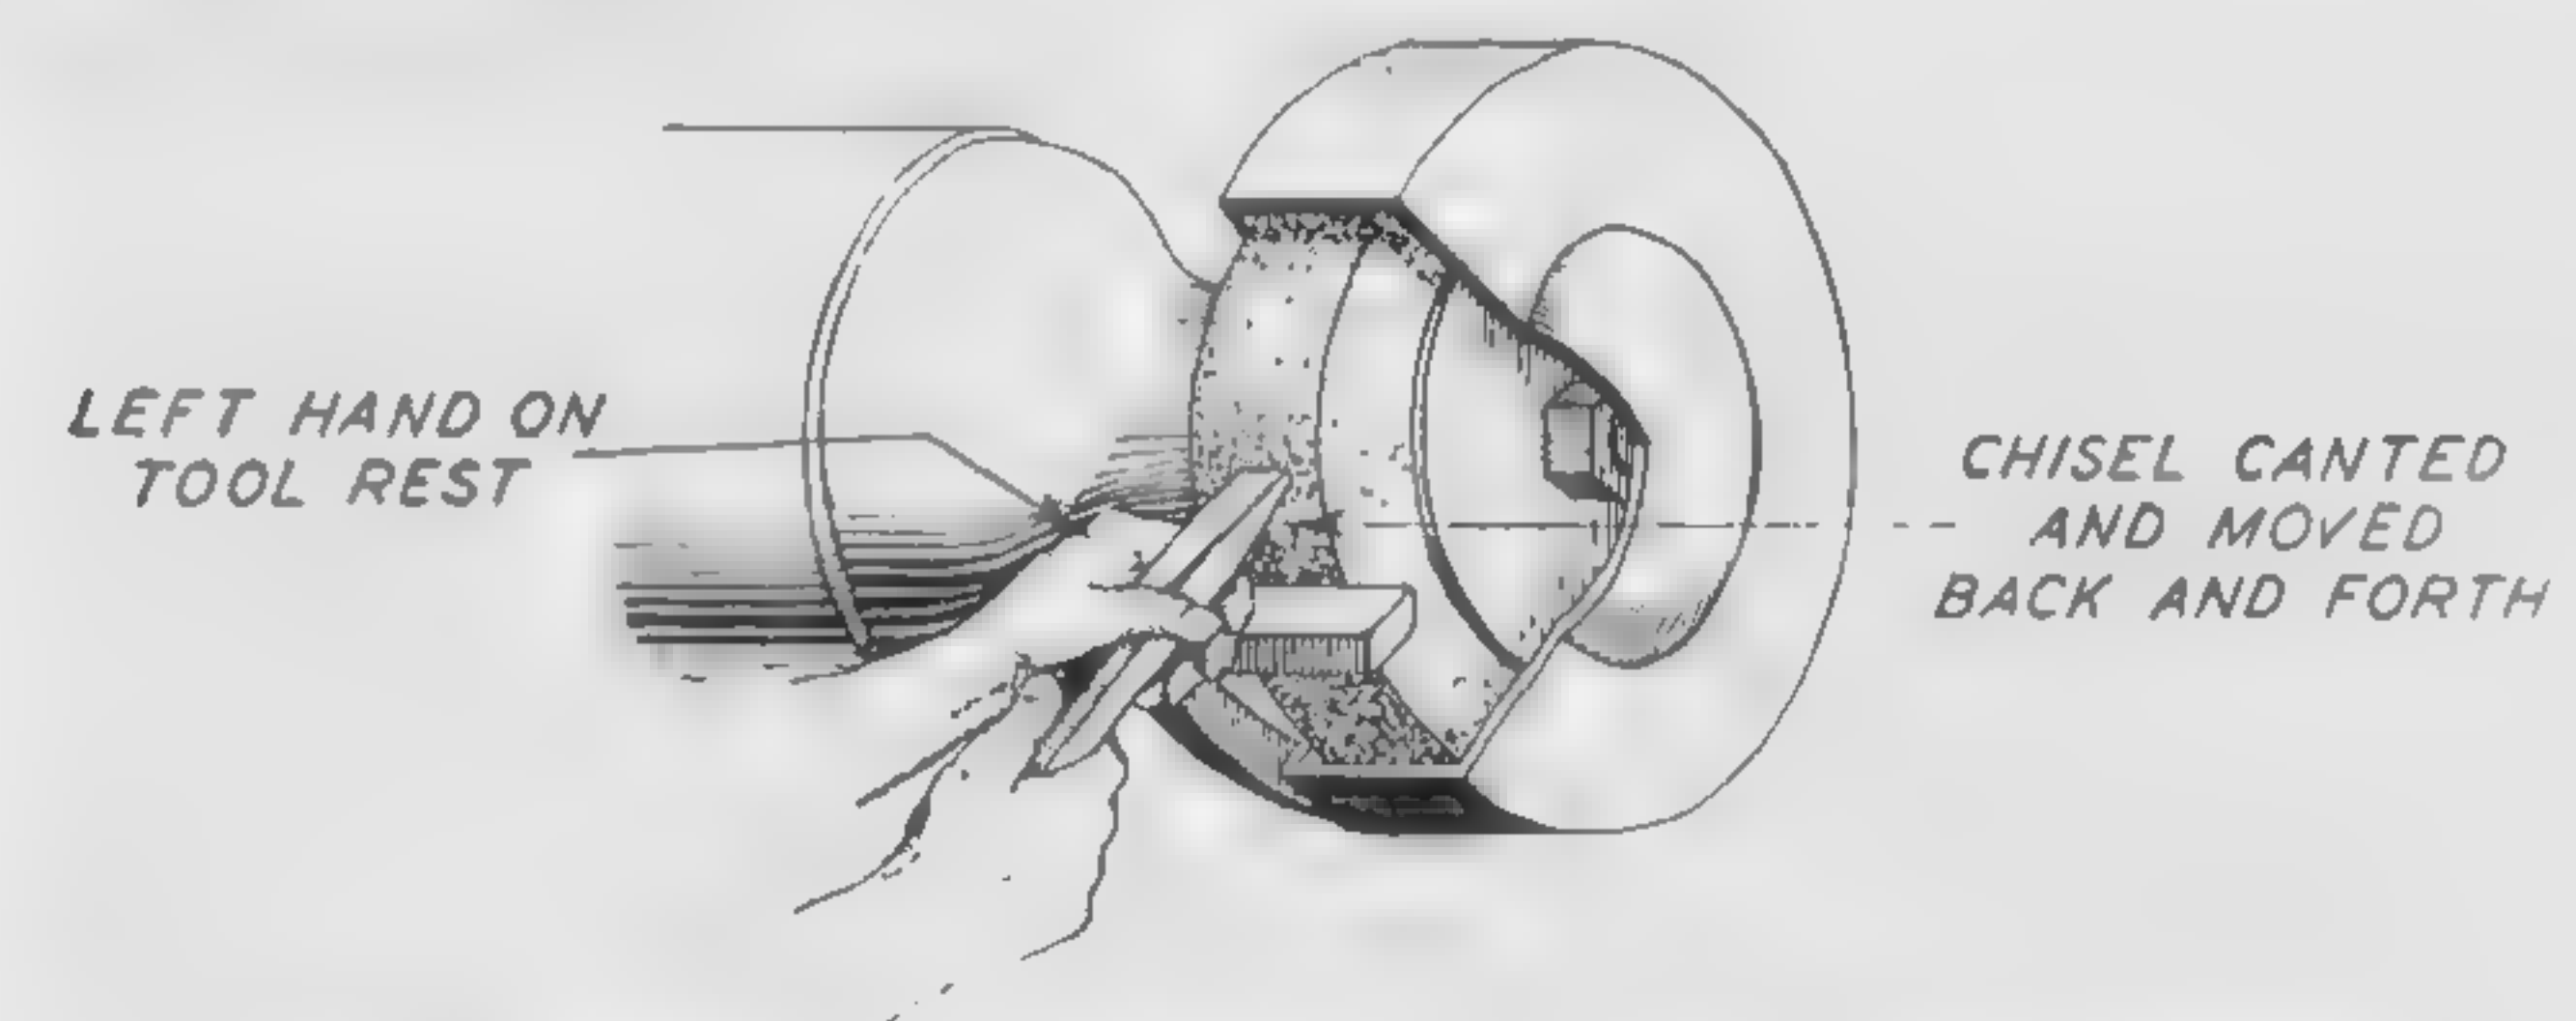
Correct Way to Hold a Cold Chisel When Grinding
